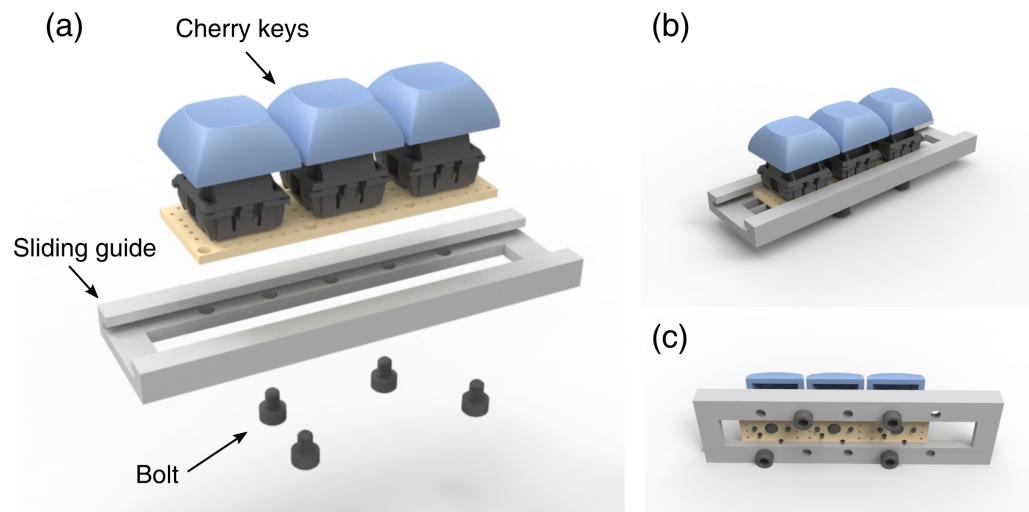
(a) Exploded view of sliding mechanism. (b) Each bank slides as a single unit, but separately from other banks. (c) Mounting holes on the bottom of the mechanism allow it to be secured to a skeleton inside the device.
